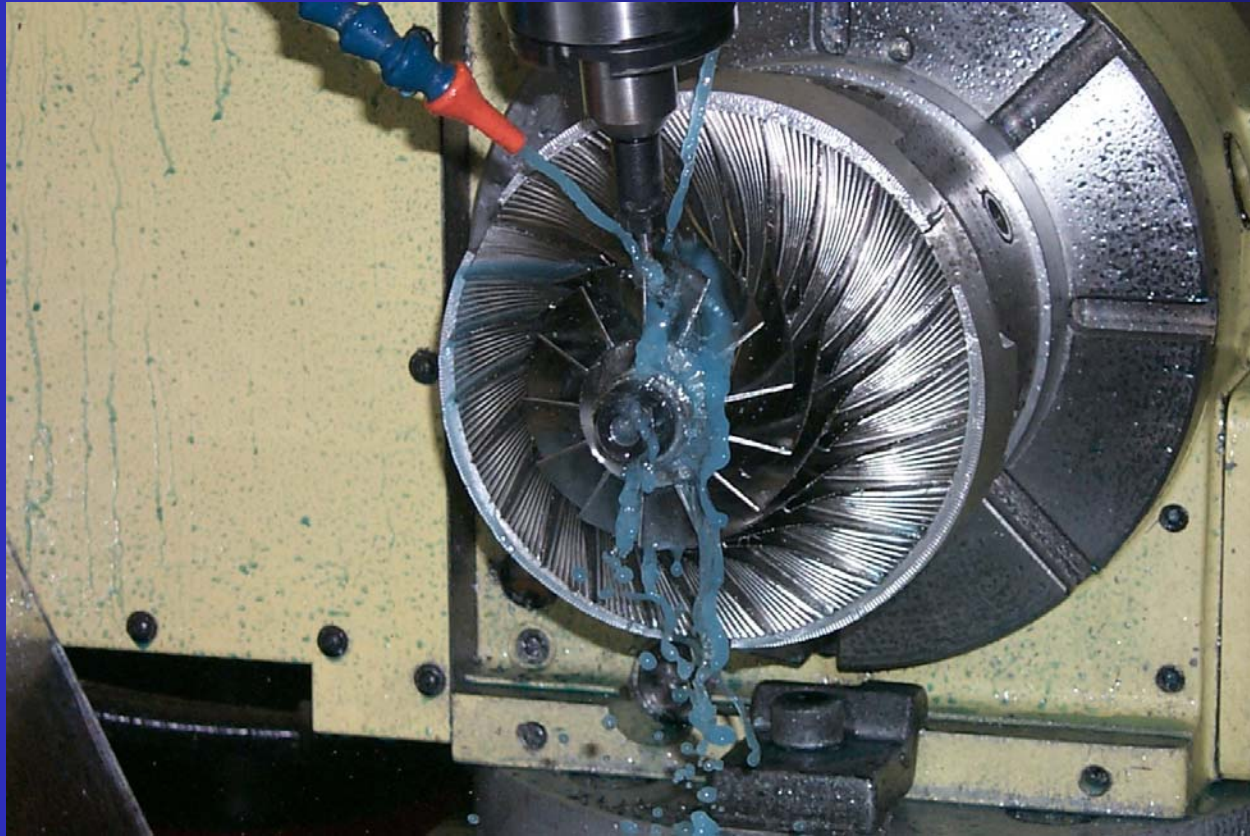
Conventional flank milling of an advanced centrifugal compressor using MAX-5.
